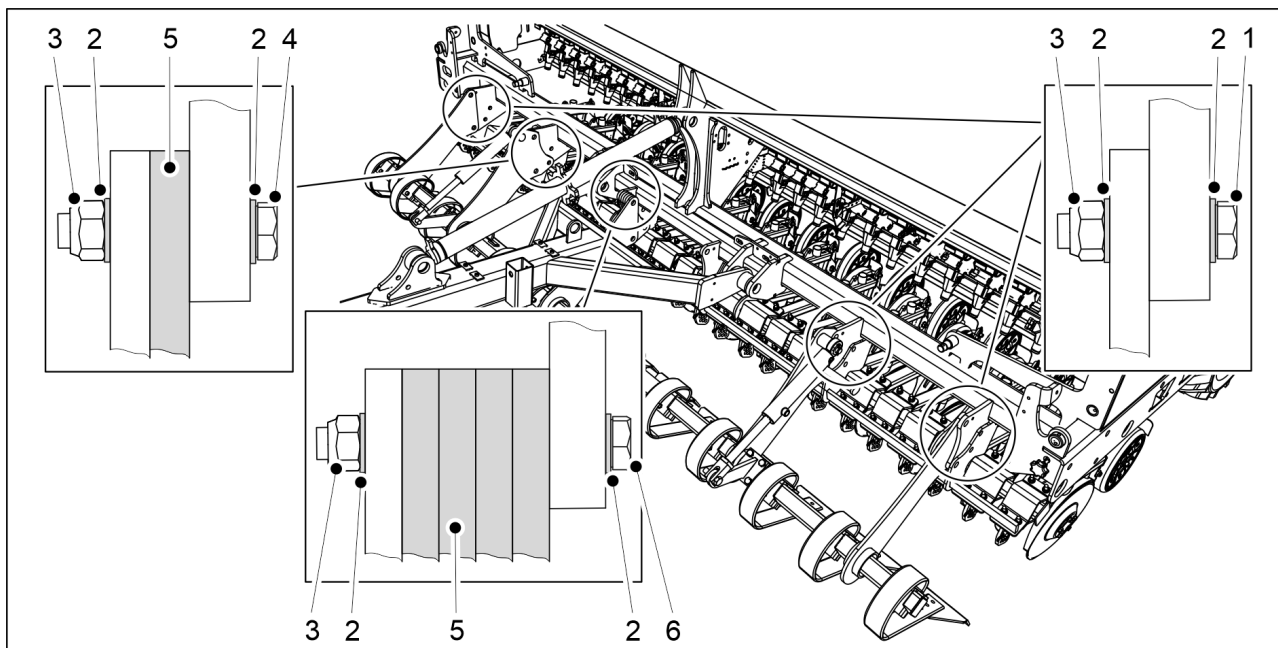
44. Mounting the front levelling board on a CEREX 400 EVO
